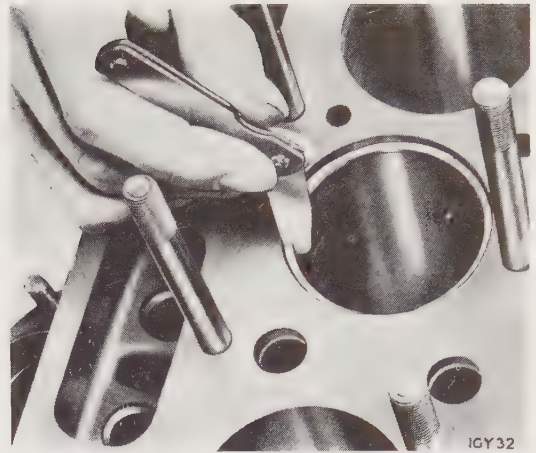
44 Measurement of piston ring gap by feeler gauge.
